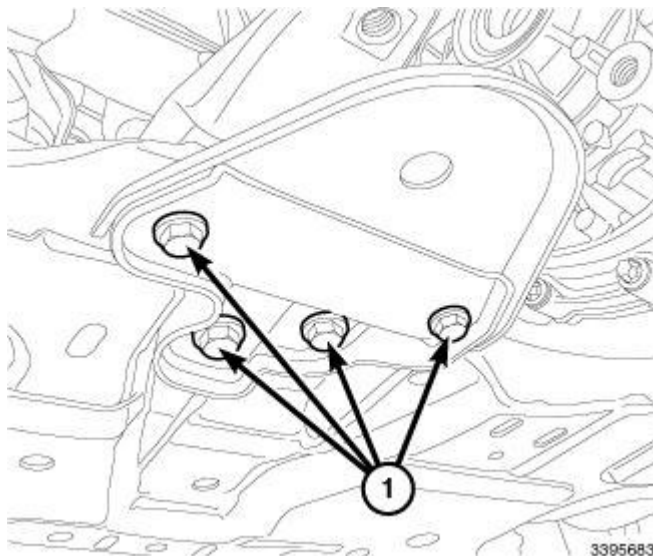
Rear Transmission Frame Mount Lower Bolts
